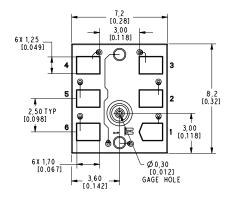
DIMENSIONAL DRAWINGS (FOR REFERENCE ONLY: MM/[IN])
